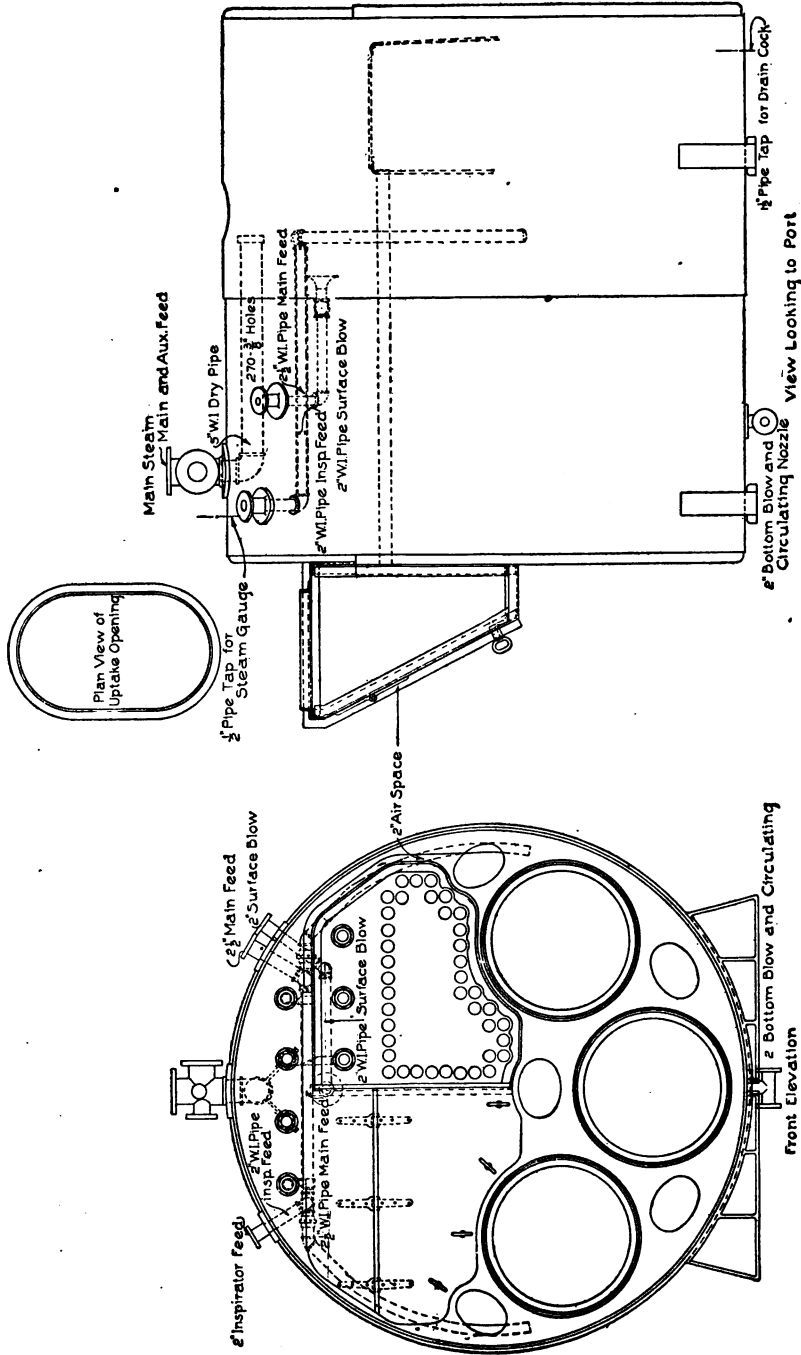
Scotch Boiler of Marine Type, Showing Arrangement of Surface and Bottom Blow-Outs.
